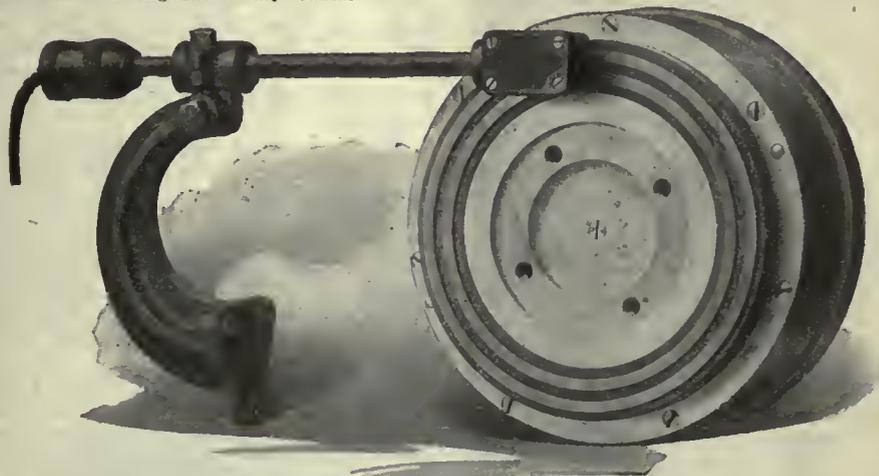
Rear view of the same chuck showing current transmitting mechanism.
